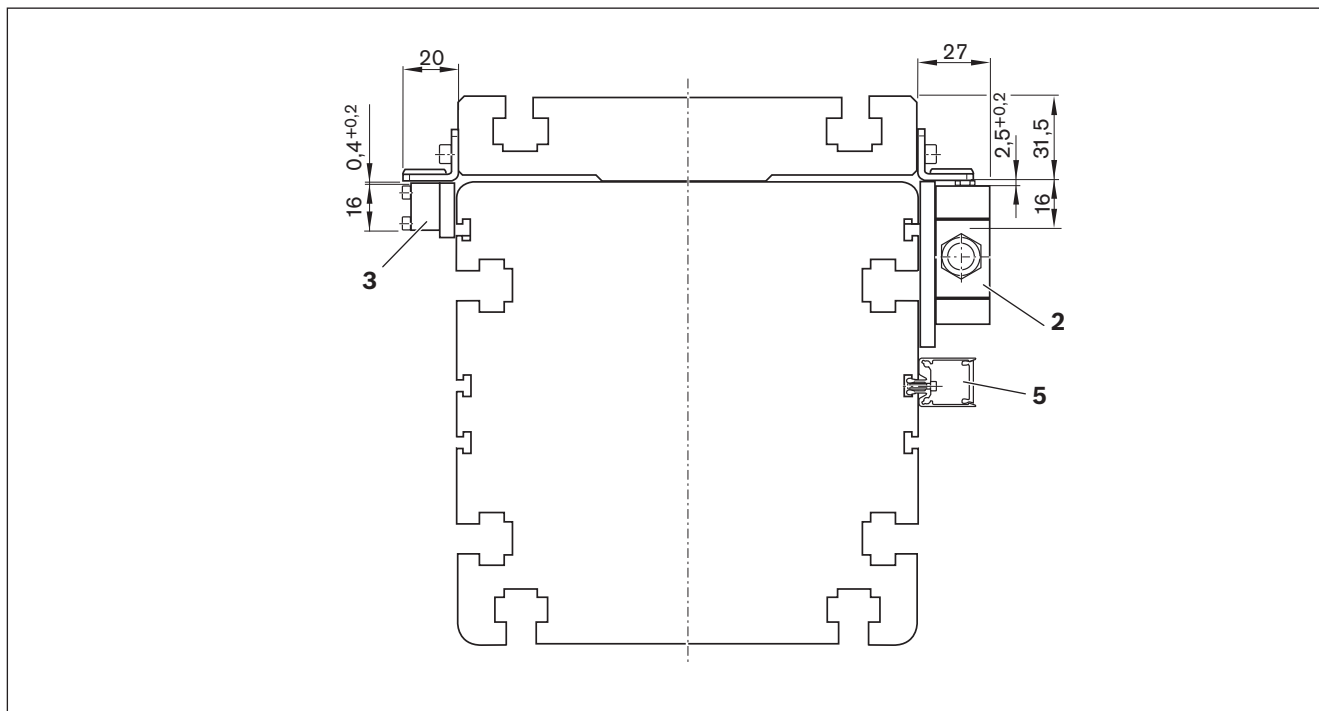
Proximity sensors and mechanical switches MKK/MKR-165-NN-2
